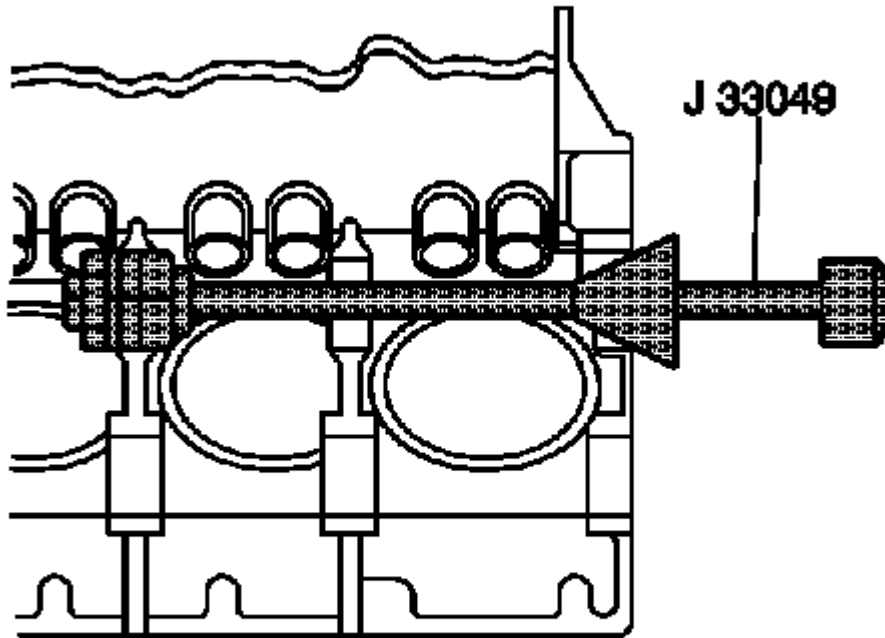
Removing/Installation Camshaft Inner Bearing Using J 33049
